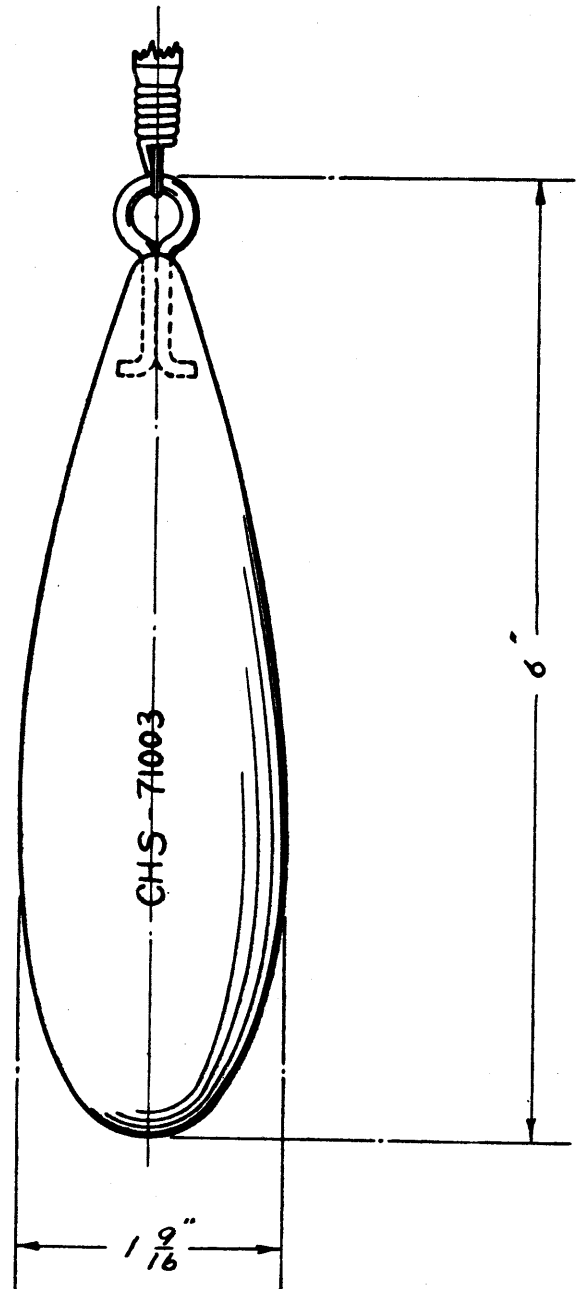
(b) COUNTER ASSEMBLY FOR USE WITH LEAD OUT INSULATOR NAF. 38843-18-18
